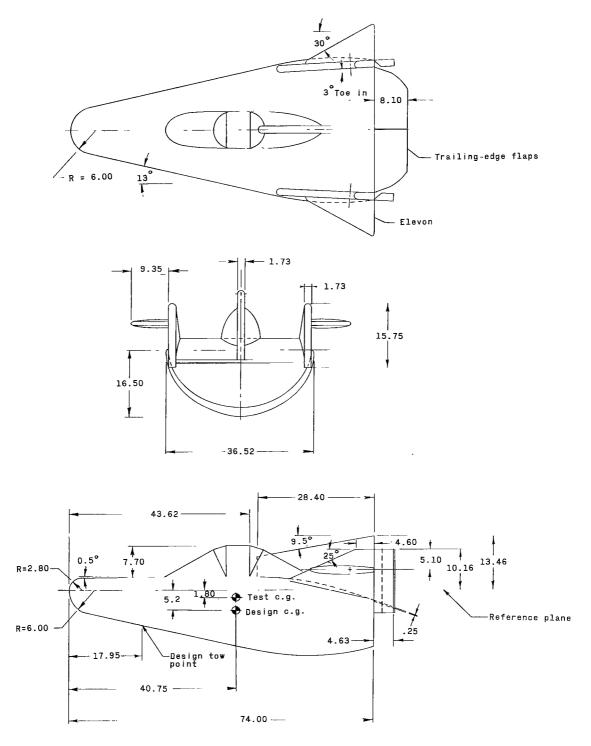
Three-view drawing of a model used in investigation. Rudder and trailing-edge flap dimensions given in chord plane. All dimensions are in inches.
